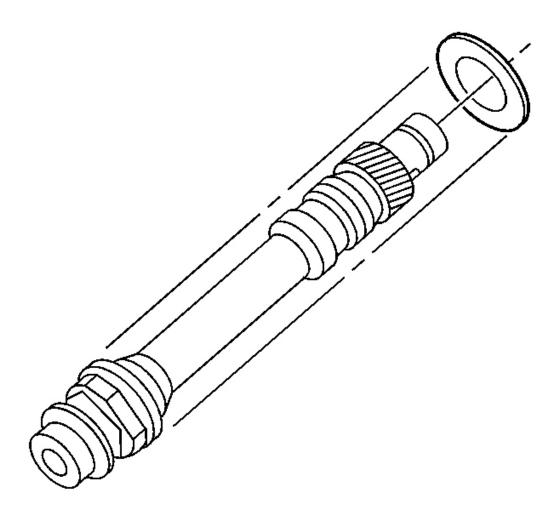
Oil Pump Drive Shaft & Gasket Courtesy of GENERAL MOTORS CORP.
